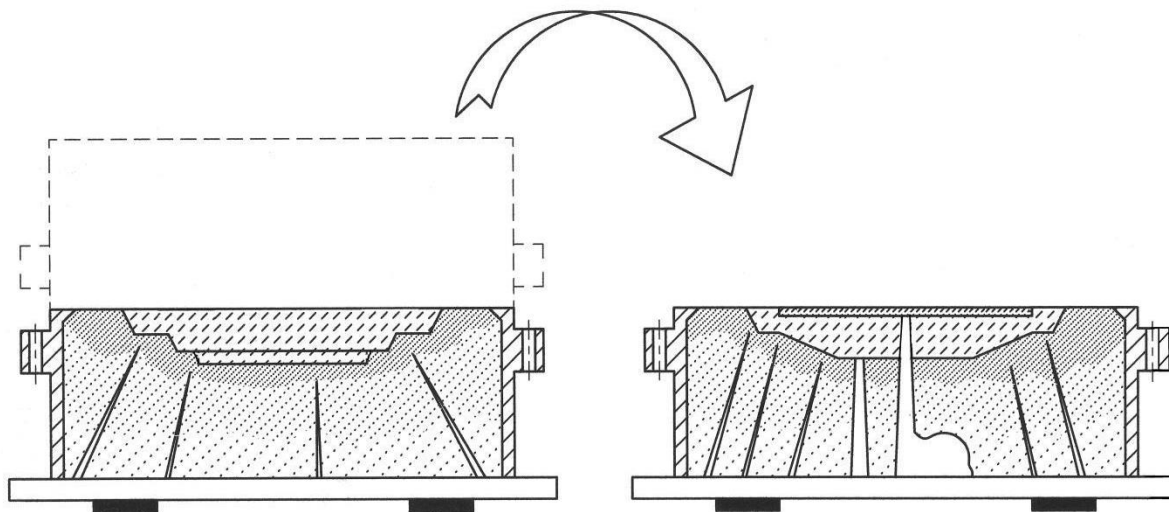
mould dismantling in order to remove patterns of component and gating system
